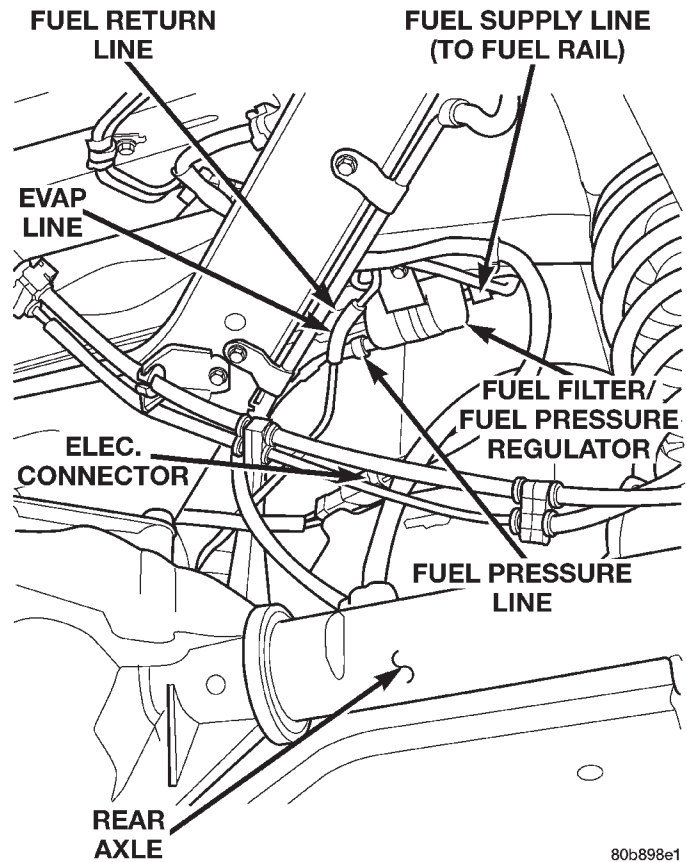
Fuel Filter/Fuel Pressure Regulator Location
